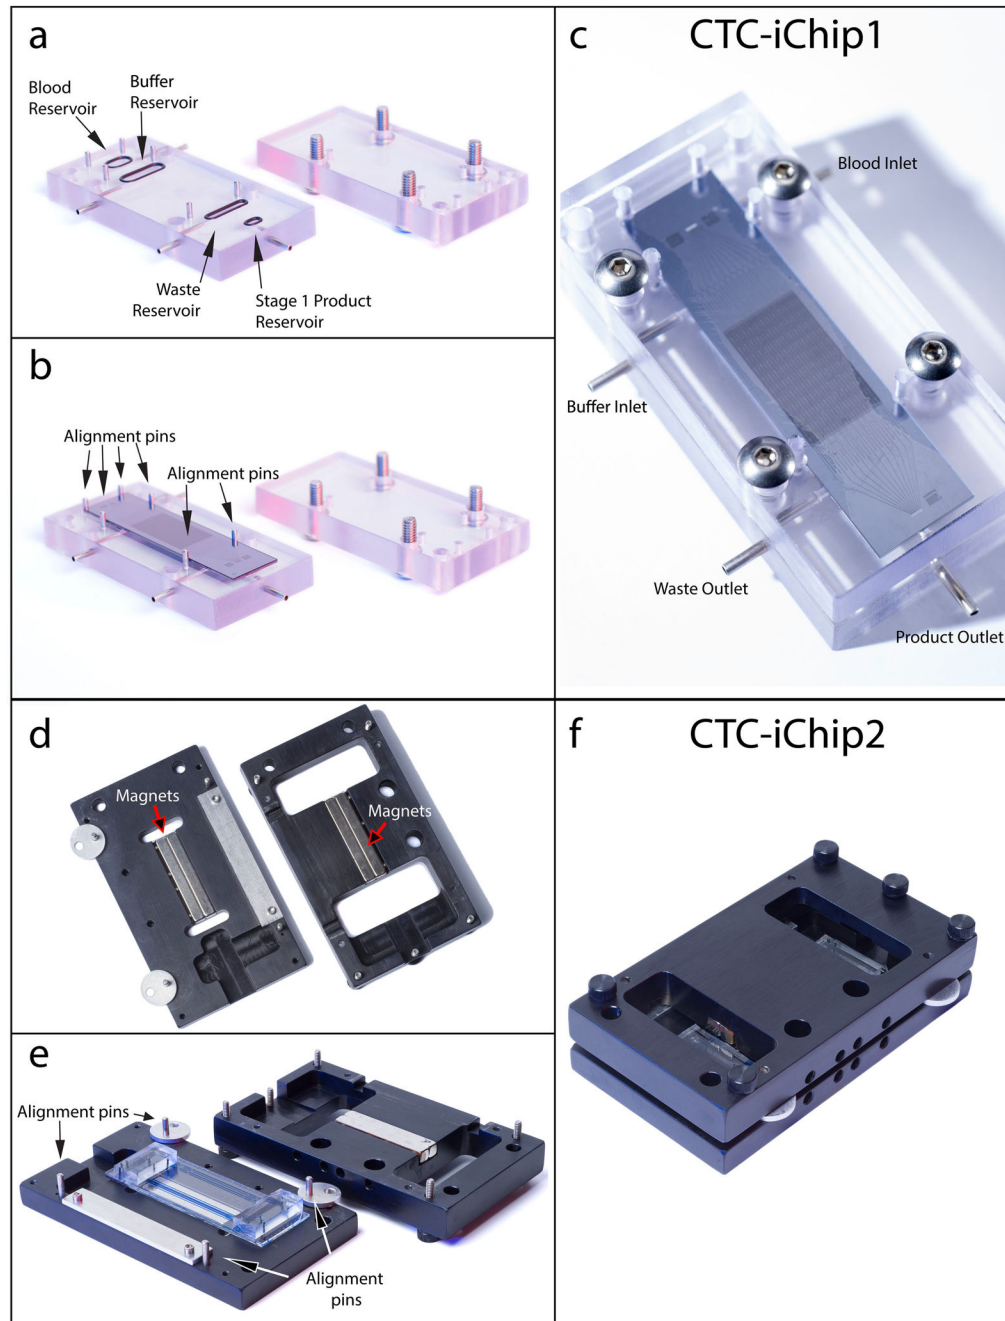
CTC-iChip assembly. (a) CTC-iChip1 manifold bottom piece with inlet and outlet O-rings attached (left) and top piece with screws in place (right). (b) CTC-iChip1 is placed on top of O-rings and fits between the metal guide posts. Fluid reservoirs, O-rings and CTC-iChip1 inlets are automatically aligned in this step. (c) The top piece is screwed into the bottom piece with the chip. (d) CTC-iChip2 manifold bottom piece (left) and top piece (right). CTC-iChip2 manifold houses the permanent magnets oriented to form a quadrupole (Fig. 5). (e,f) CTC-iChip2 is placed on the manifold bottom piece (e), is aligned (as detailed in Fig. 5).
